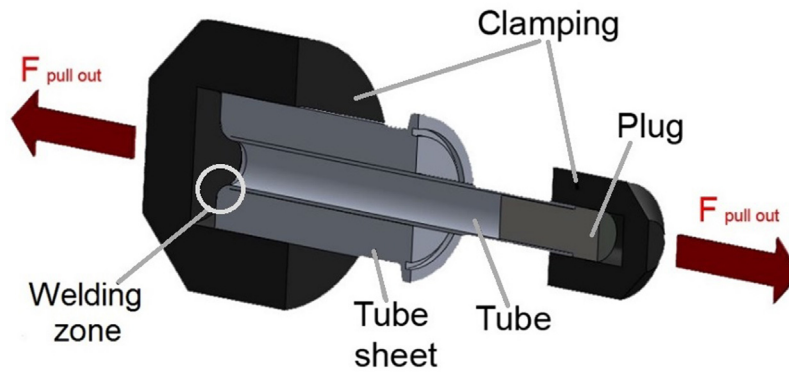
Schematic setup for tensile pull-out tests of single hole tube to tube-sheet HFDB joints. The plug prevents tube collapse during testing.
